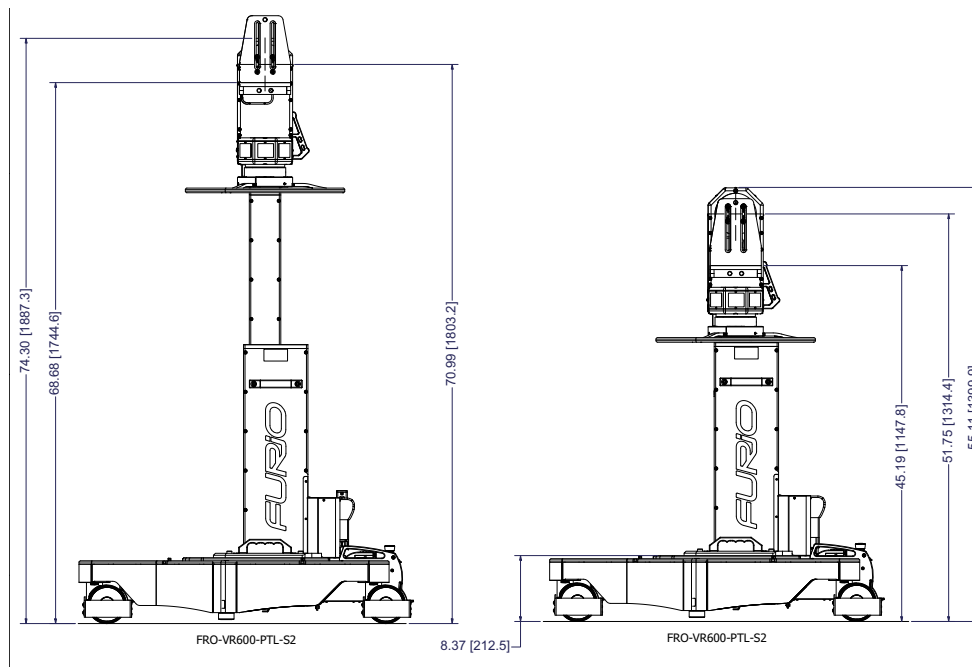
Dimensions of the BlackBird S2 Pedestal with a VR600 Head (side view)
